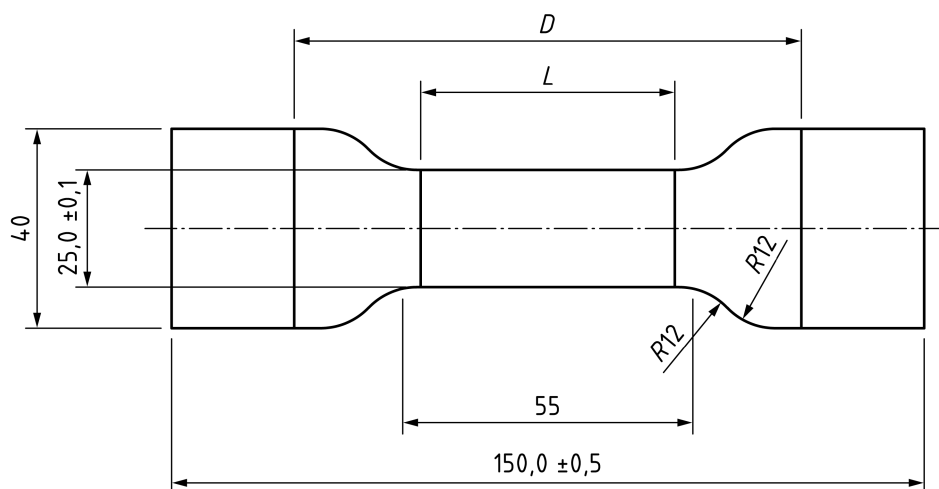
Dimensions and shape of tensile test specimen - Method 1
